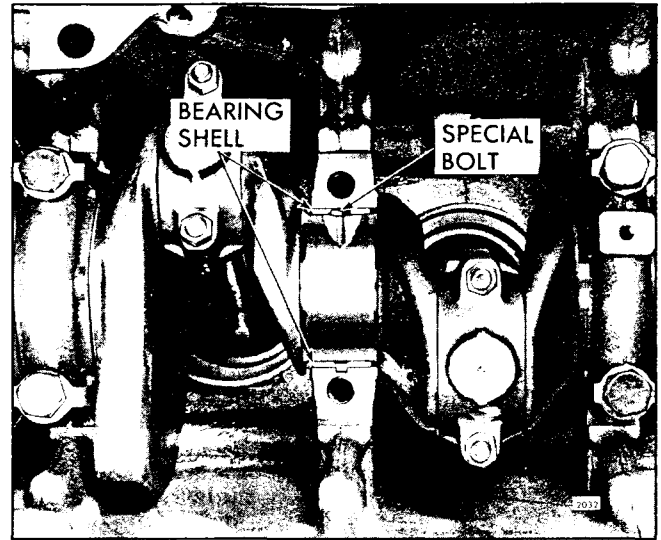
Removing Main Bearing Upper Shell (Except Rear Main) - Crankshaft in Place
